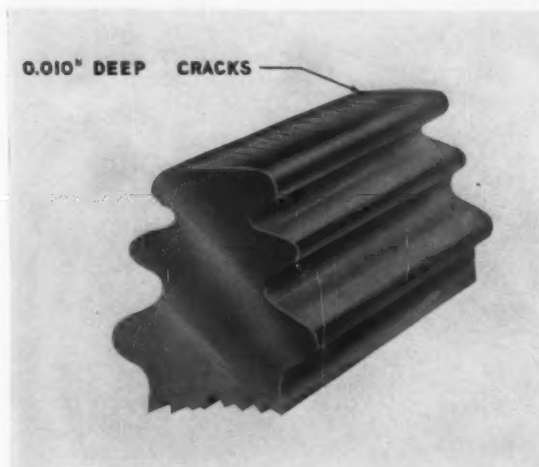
Cracks located in the bottom of the root section of turbine buckets made for jet engines were revealed by visual inspection with a fluorescent penetrant.
